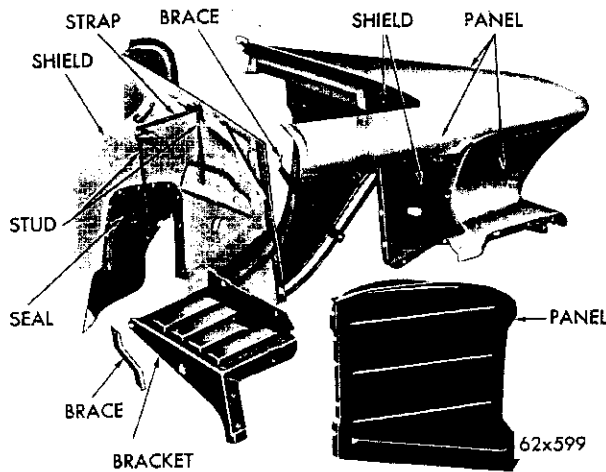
Disassembled Front Fender and Splash Shield (Imperial)
